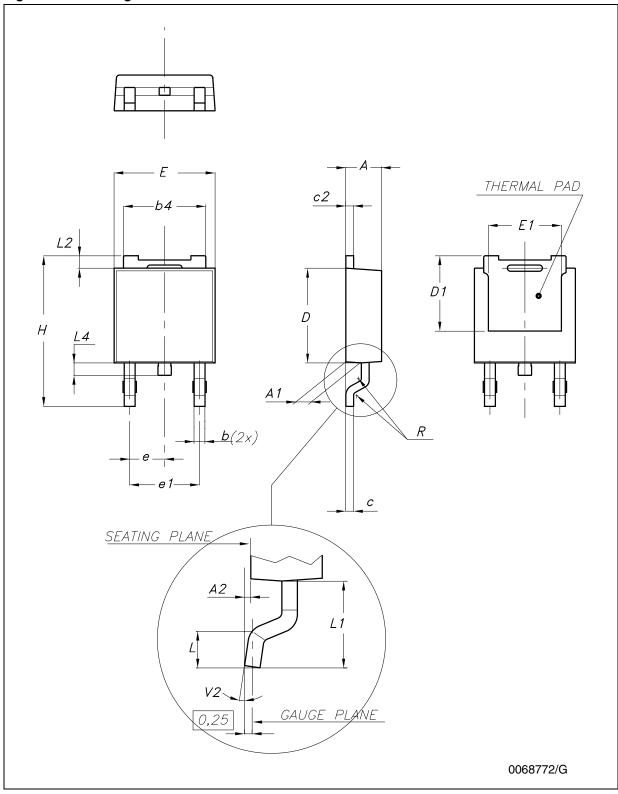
Drawing dimension DPAK TYPE IDS-Subcon.
